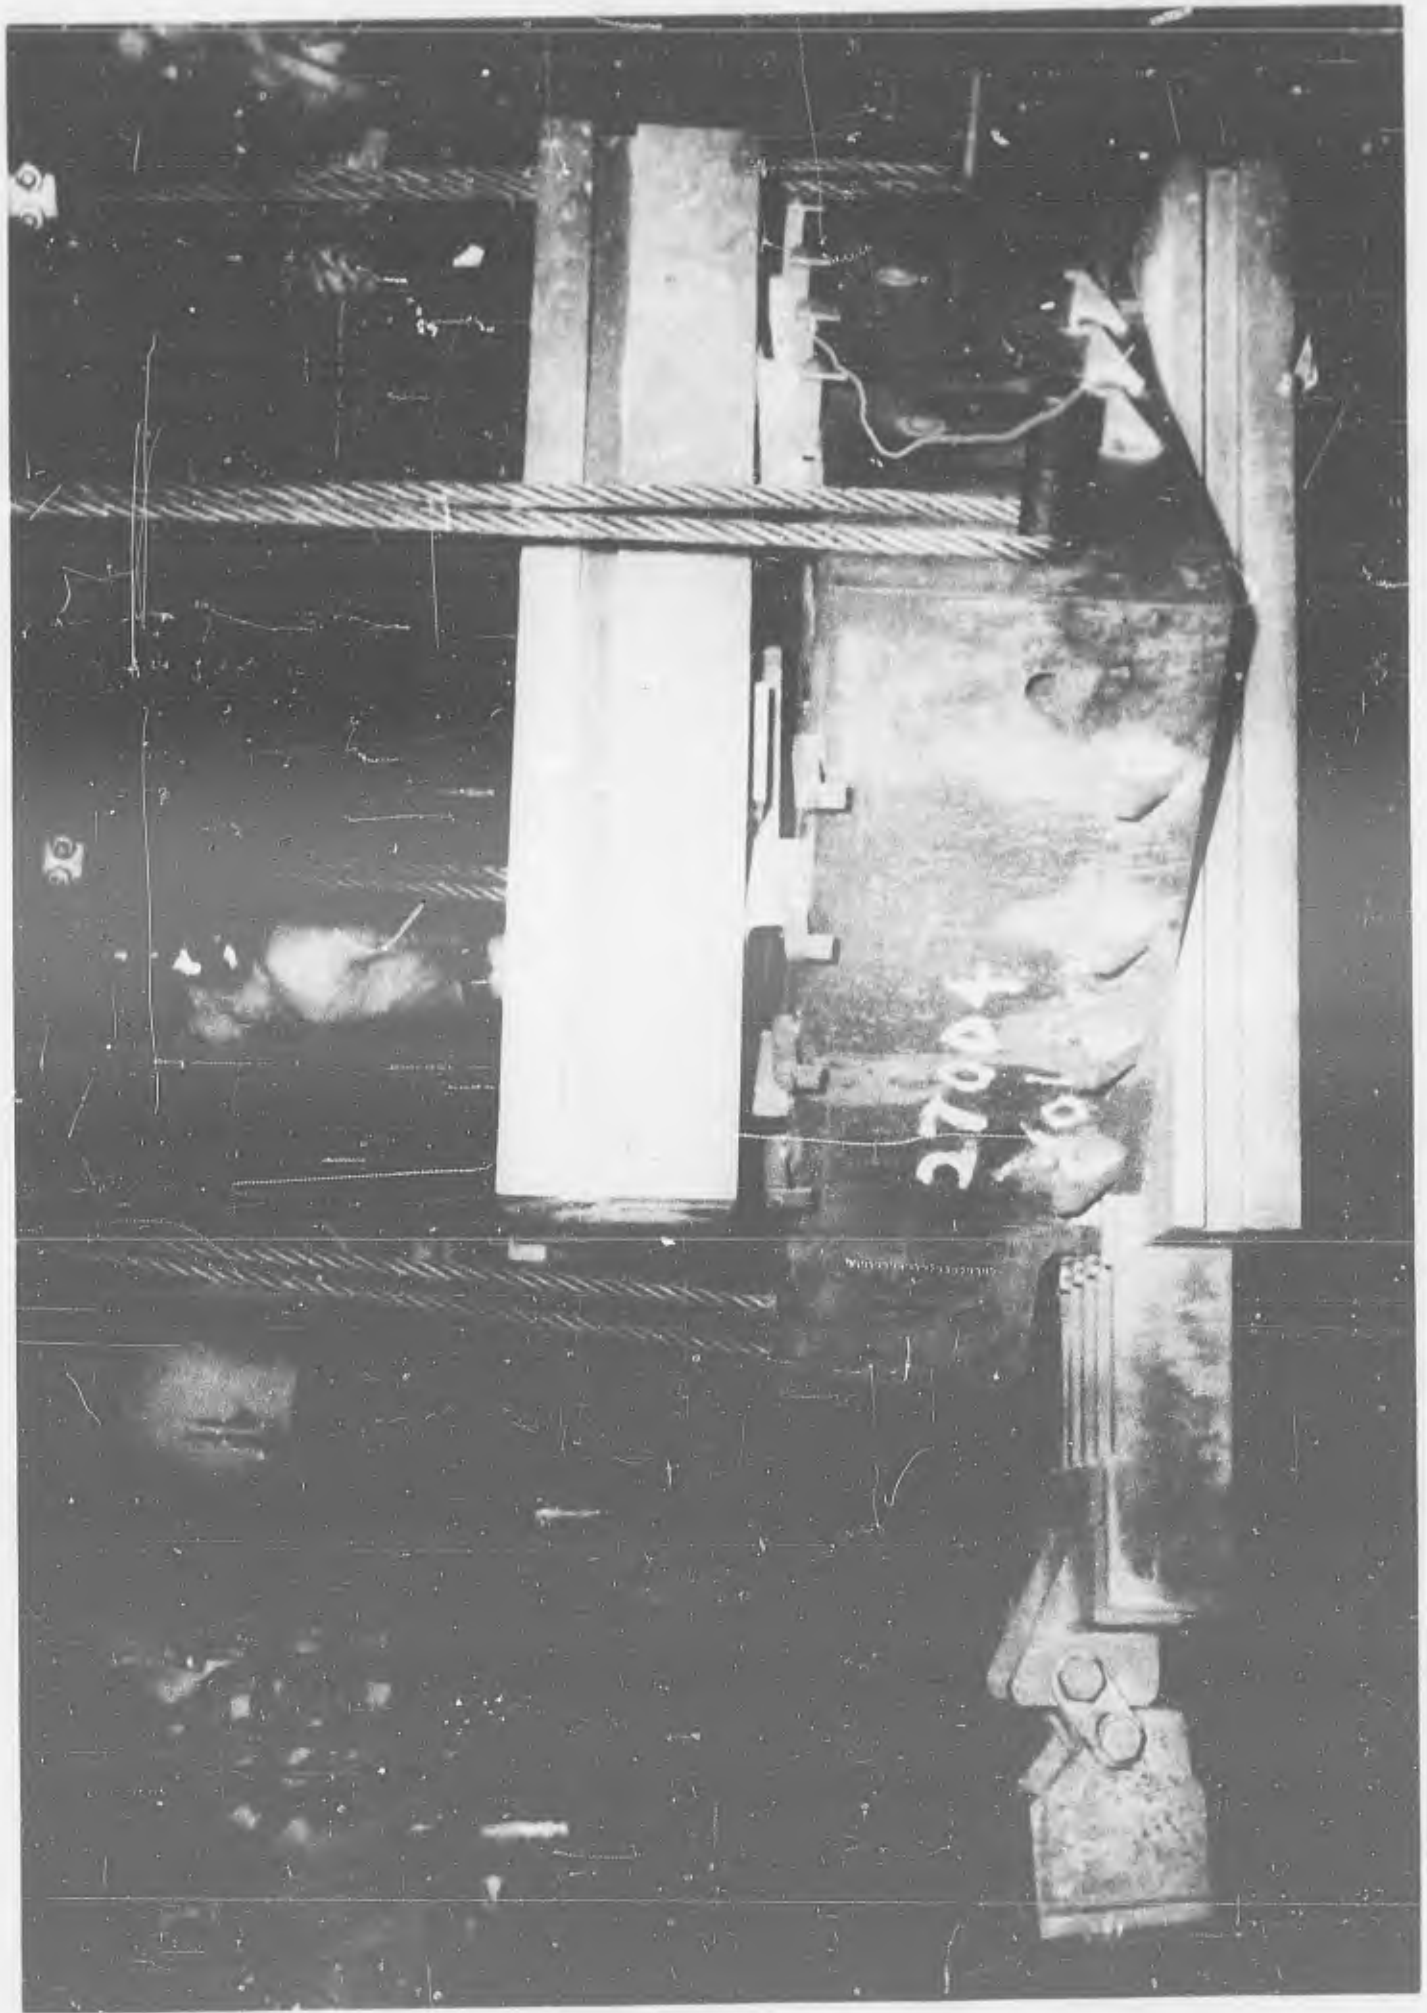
Upper and Lower Die Blocks and Knockout Wedges.
